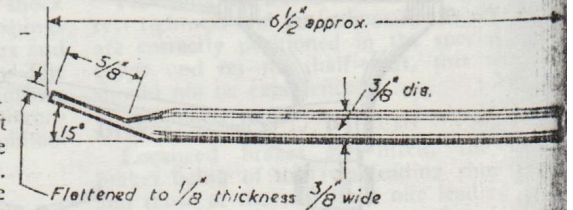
Punch for removing mainshaft bearing outer member from casing.
